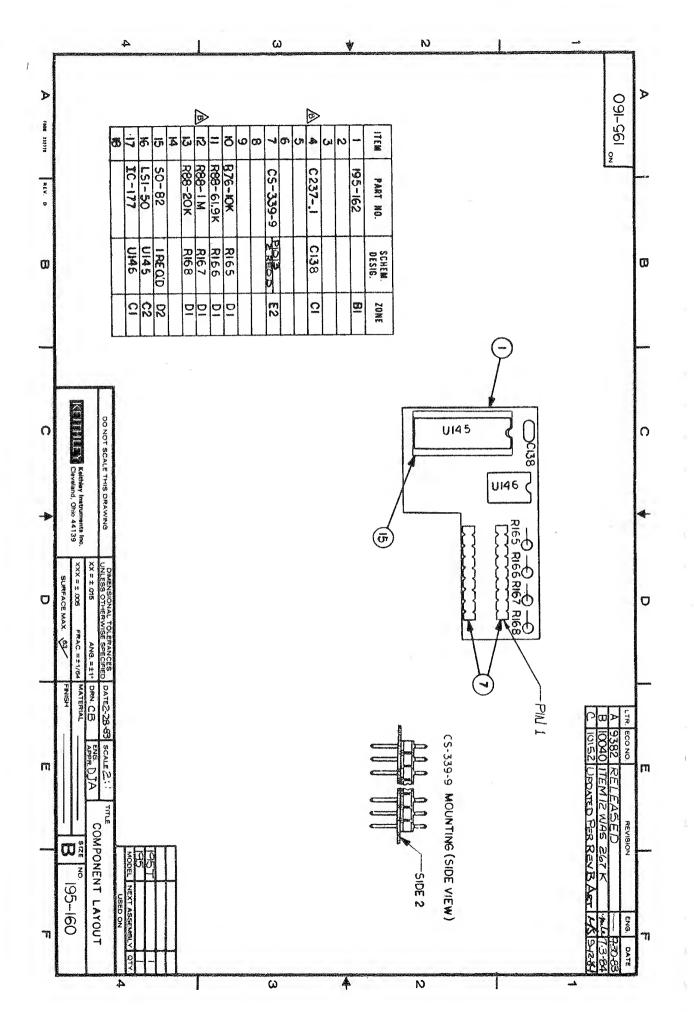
NVRAM Modifications Board, Component Location Drawing, Dwg. No. 195-160
